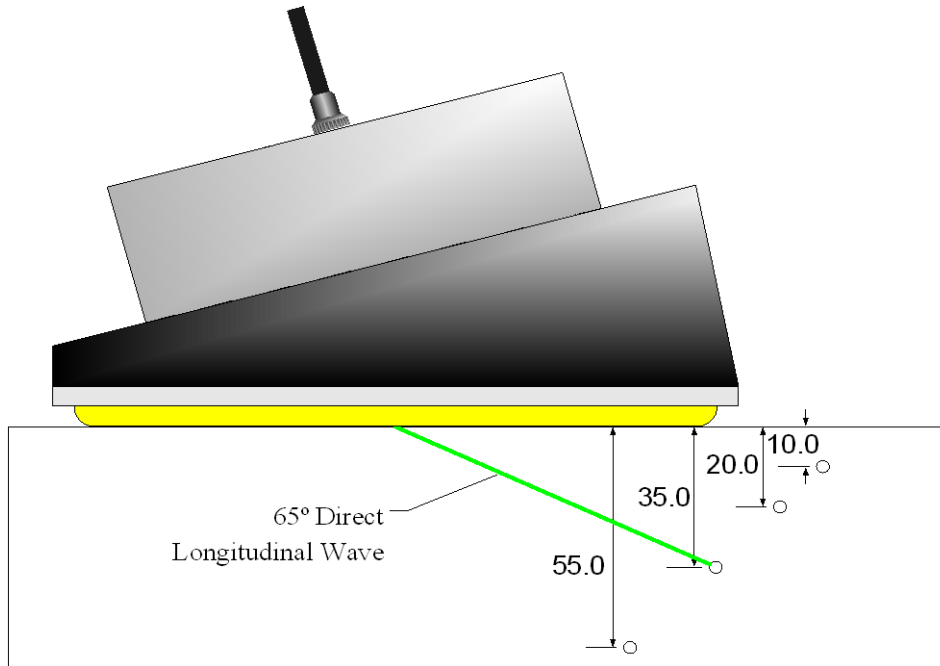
Schematic diagram of the flat plate non-welded test-piece calibration set-up.
